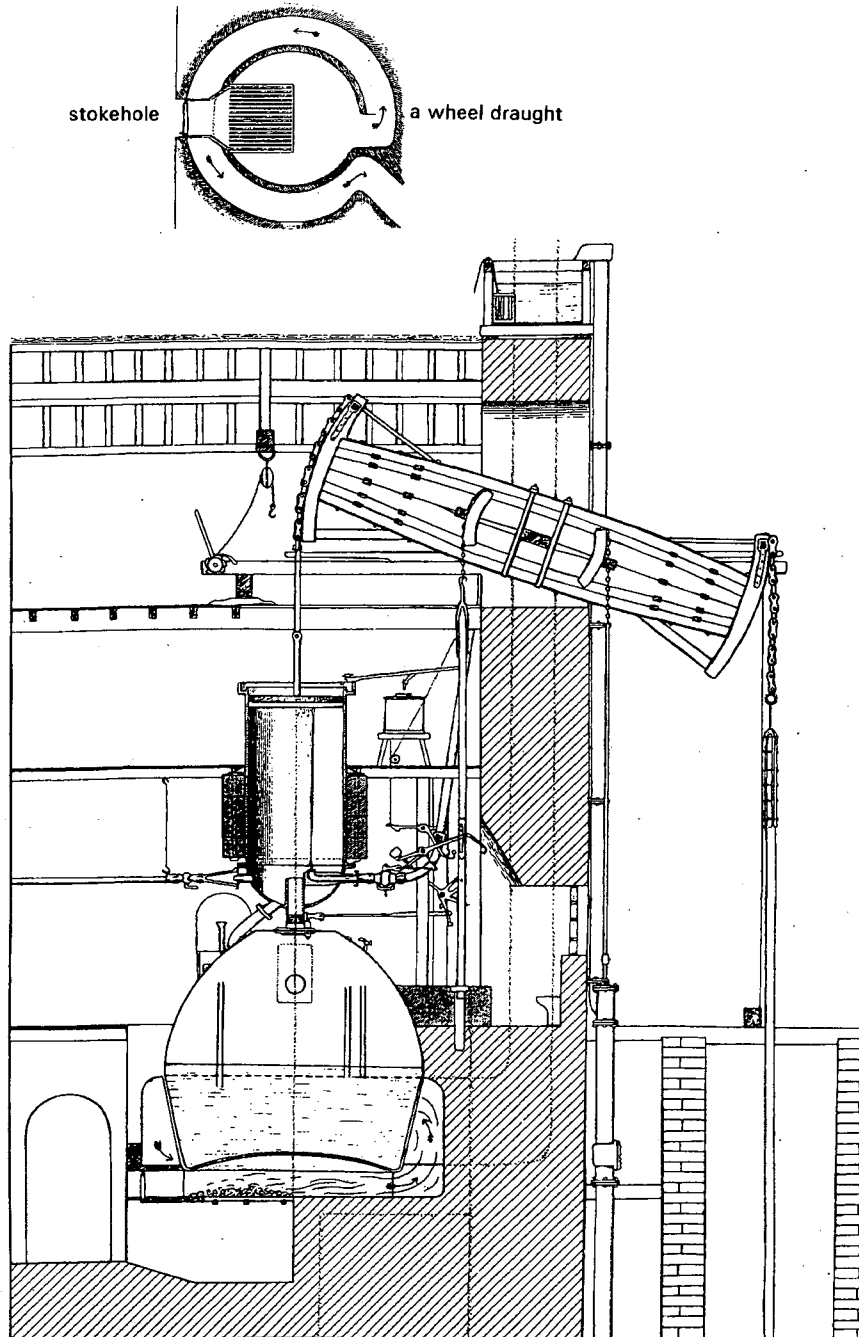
Elevation of an engine-house showing the shaft, the beam, the cylinder, a haystack boiler and wheeldraught. Above: diagram of a wheel-draught. (From Farey 1827.)
